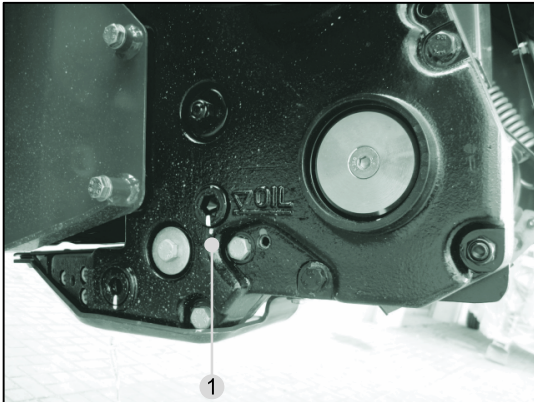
Oil inspection plug (1) on the side entry gearbox of the cutterbar
